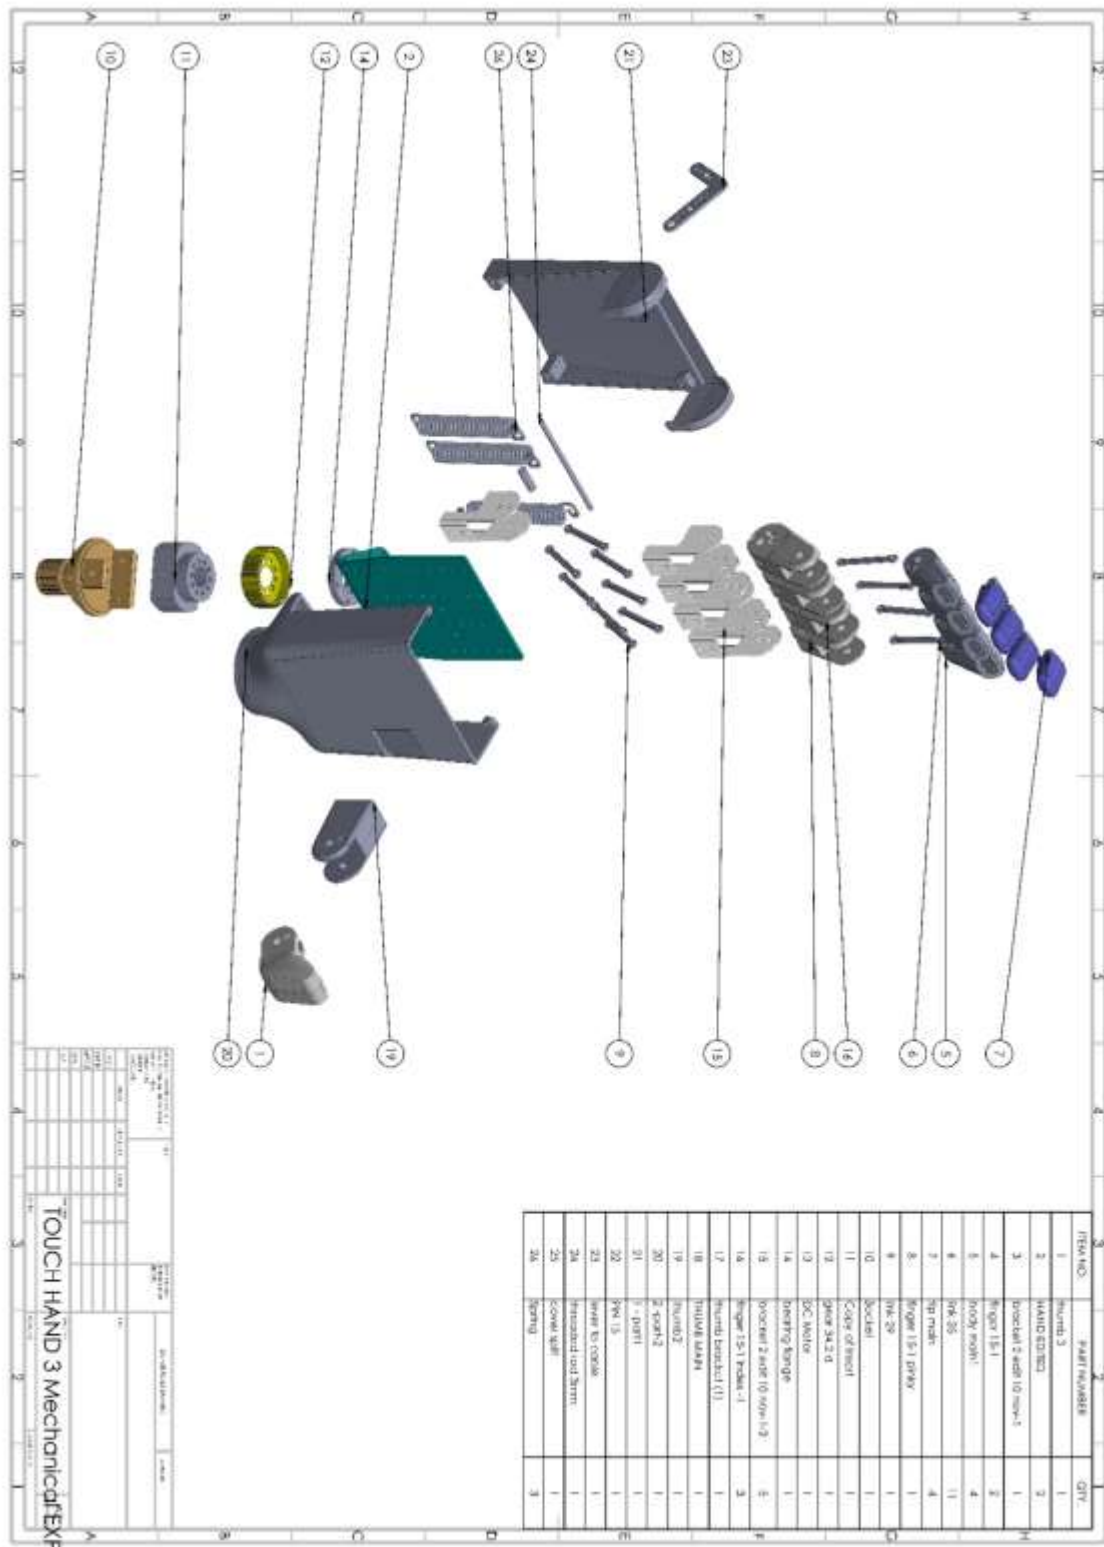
Touch hand 3 mechanical hand exploded drawing.
